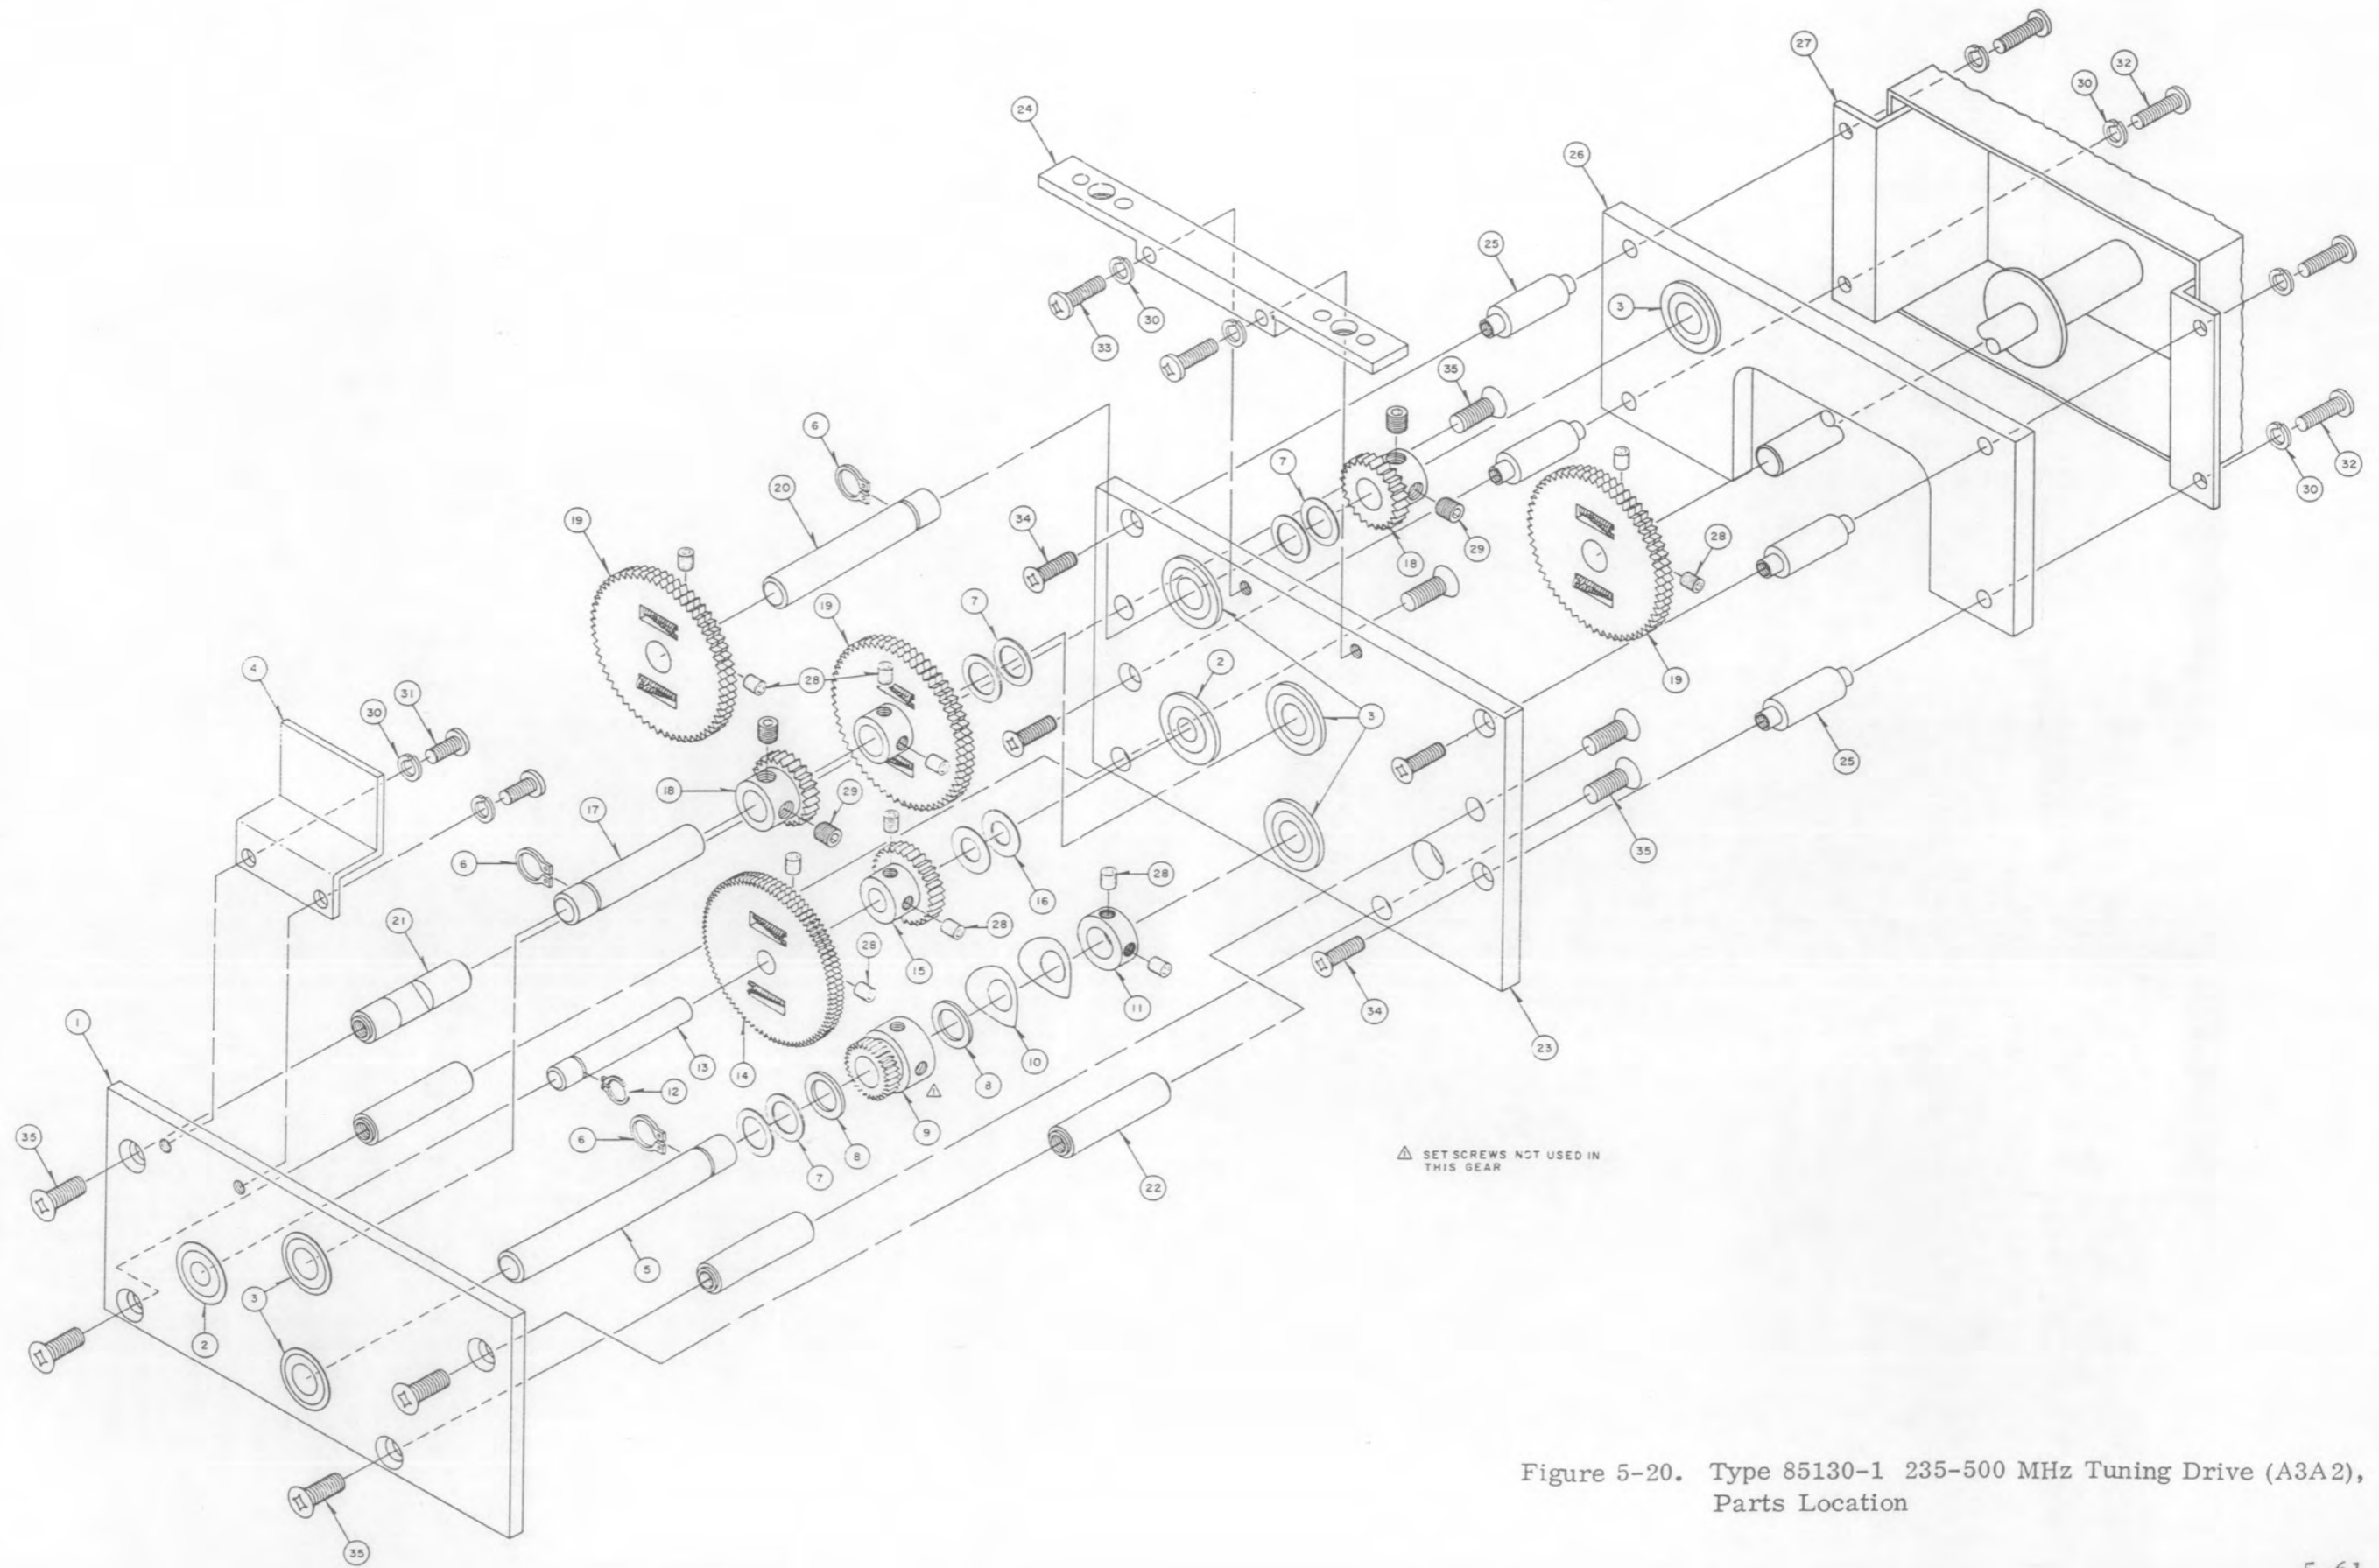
Type 85130-1 235-500 MHz Tuning Drive (A3A2), Parts Location
